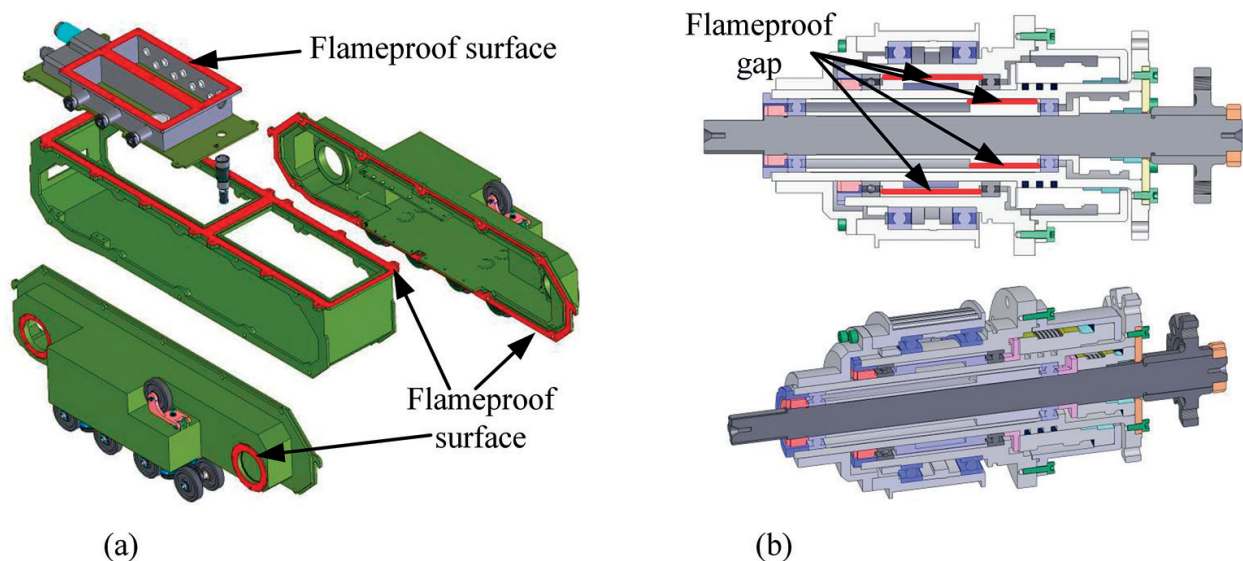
Explosion-proof designs of the mechanical system. (a) Plane anti-explosion design; (b) cylinder anti-explosion design.
